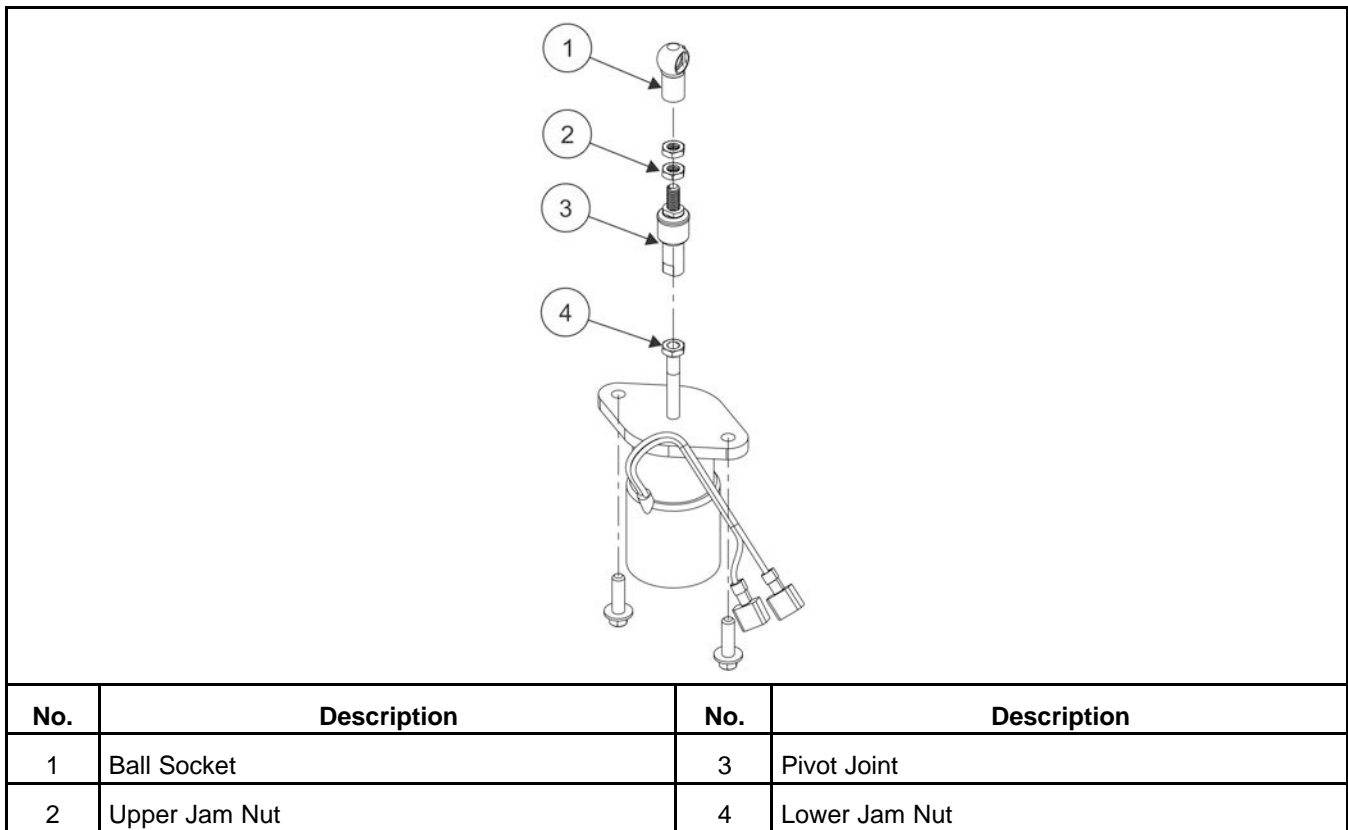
GOVERNOR LINKAGE ASSEMBLY
